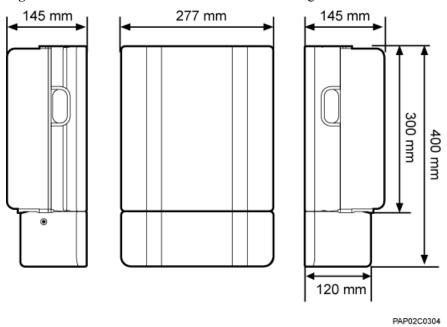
Dimensions of a BTS3902E with a housing and antennas
